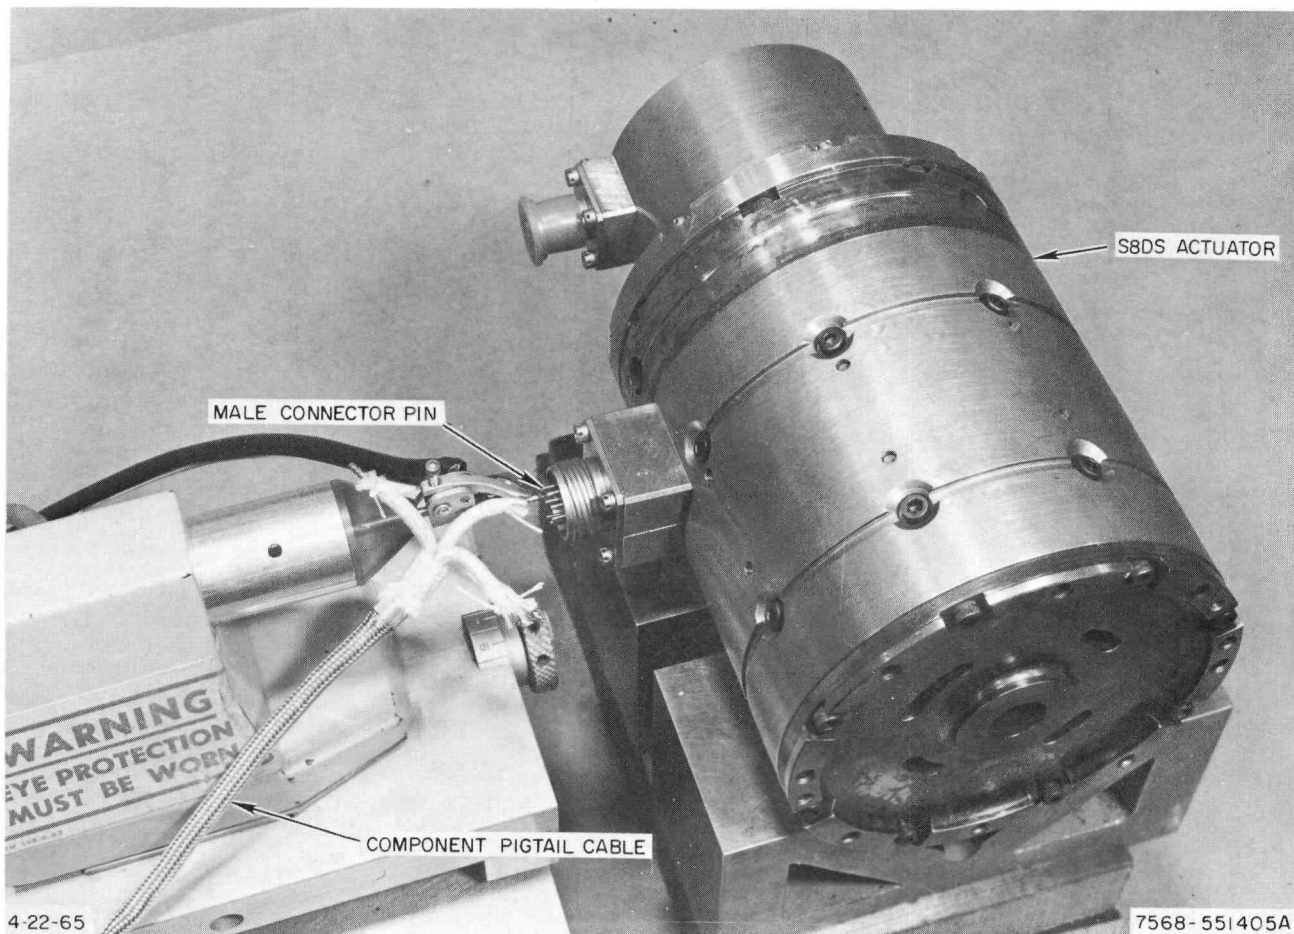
Welding of Pigtail Cable to Component Connector
